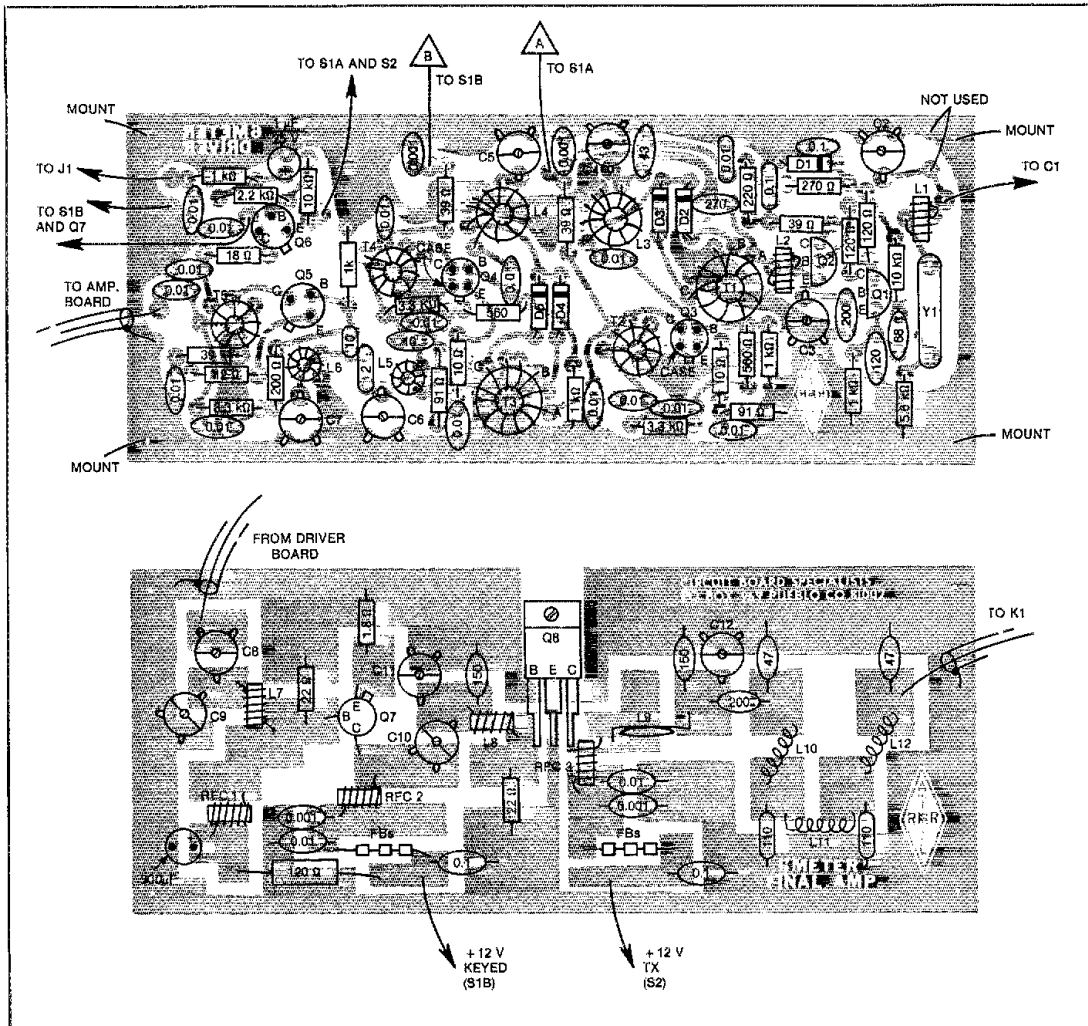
Shown here are the parts-placement diagrams for the driver board (A) and final-amplifier board (B). Views are from the component side of the boards, with gray areas representing unetched copper.
